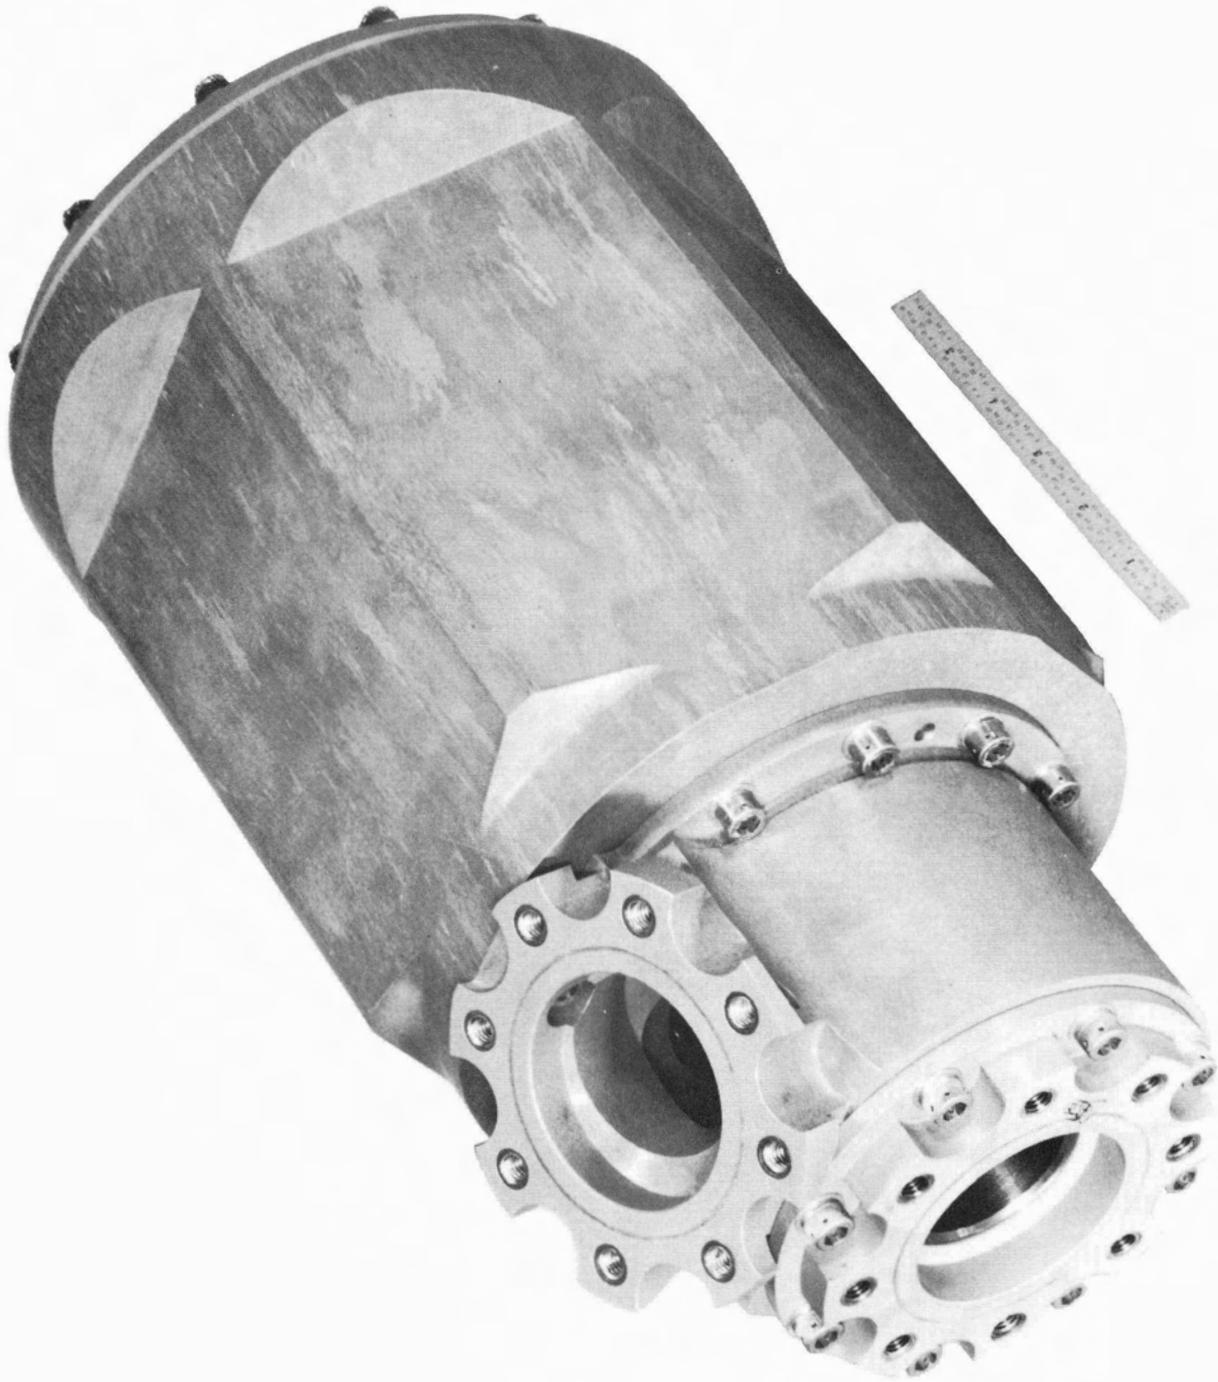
HYDRAULIC TRANSFORMER DEVELOPMENT UNIT
